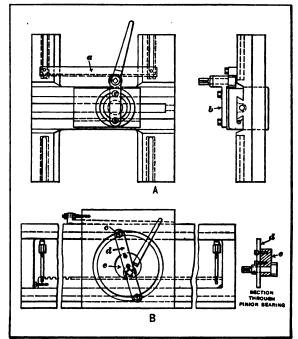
Rack-and-pinion Traversing Devices applied to Lathe Cross-slide and Planer Saddle
